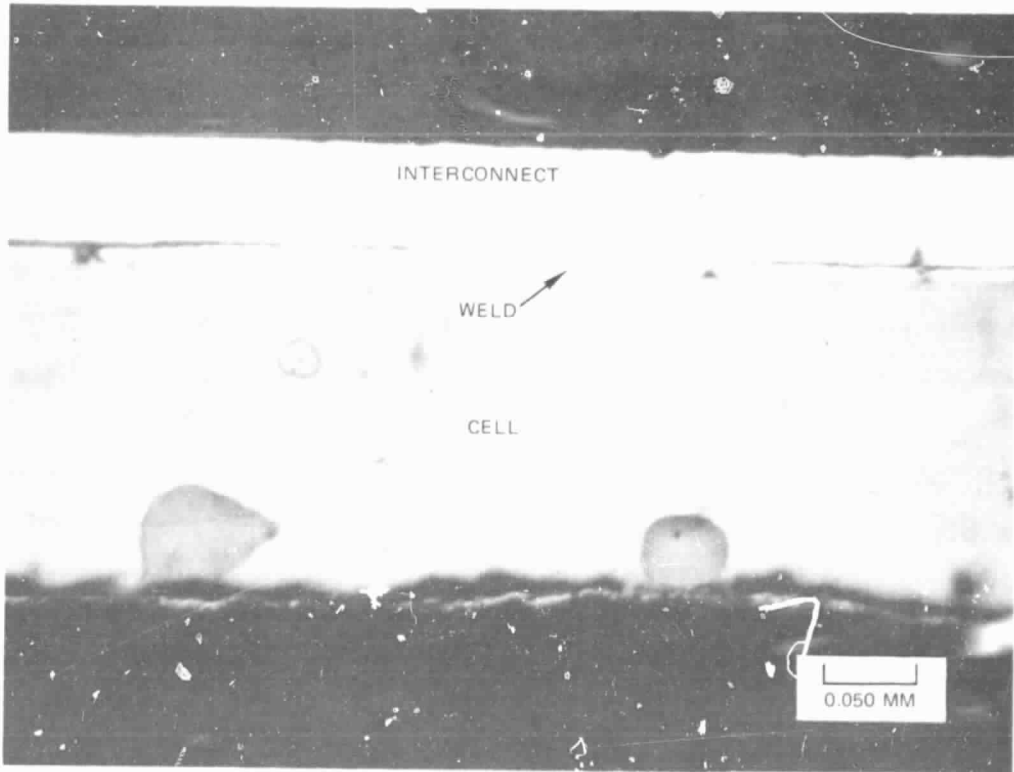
PARALLEL GAP WELD CROSS SECTION
